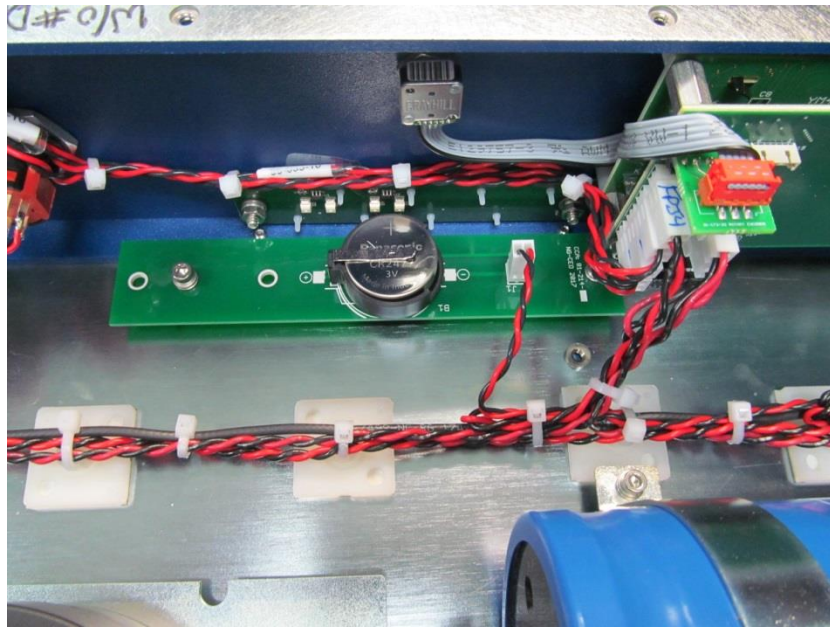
2U Remote Battery Holder Circuit Card Assembly Location
